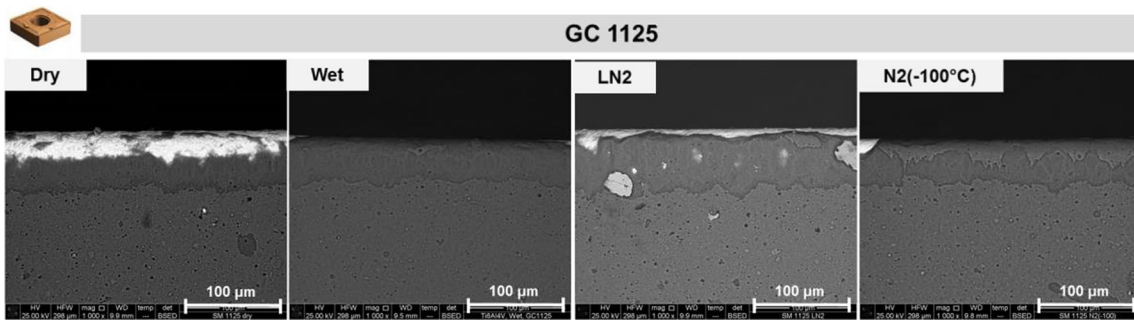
Tool flank wear after 15 min of turning under dry, wet, LN2 and cooled gaseous N2 conditions for the insert GC1125
